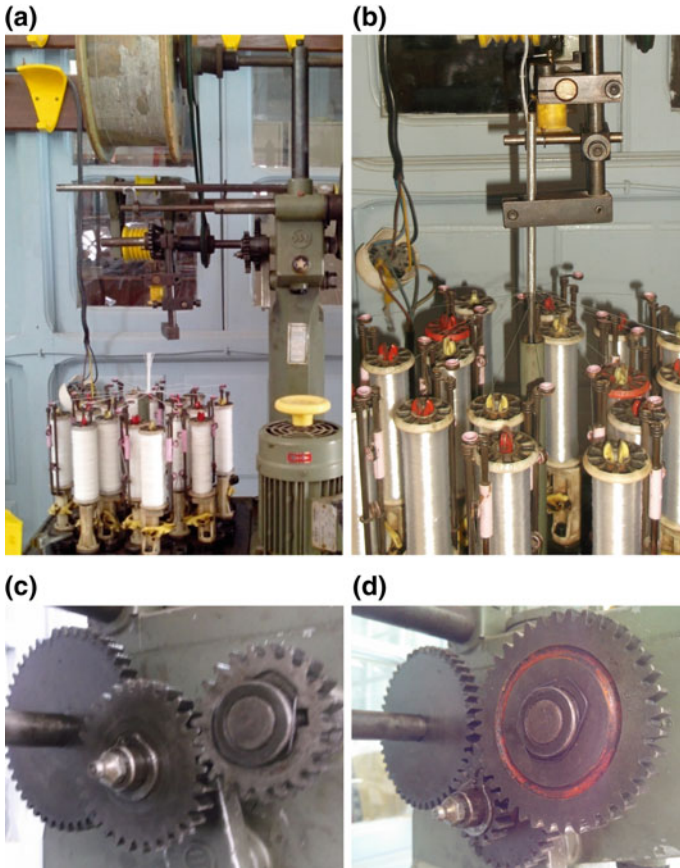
Braiding machine. a General view b Braid formation and mandrel guidance c Gears setting for the higher braiding angle d Gears setting for the lower braiding angle
